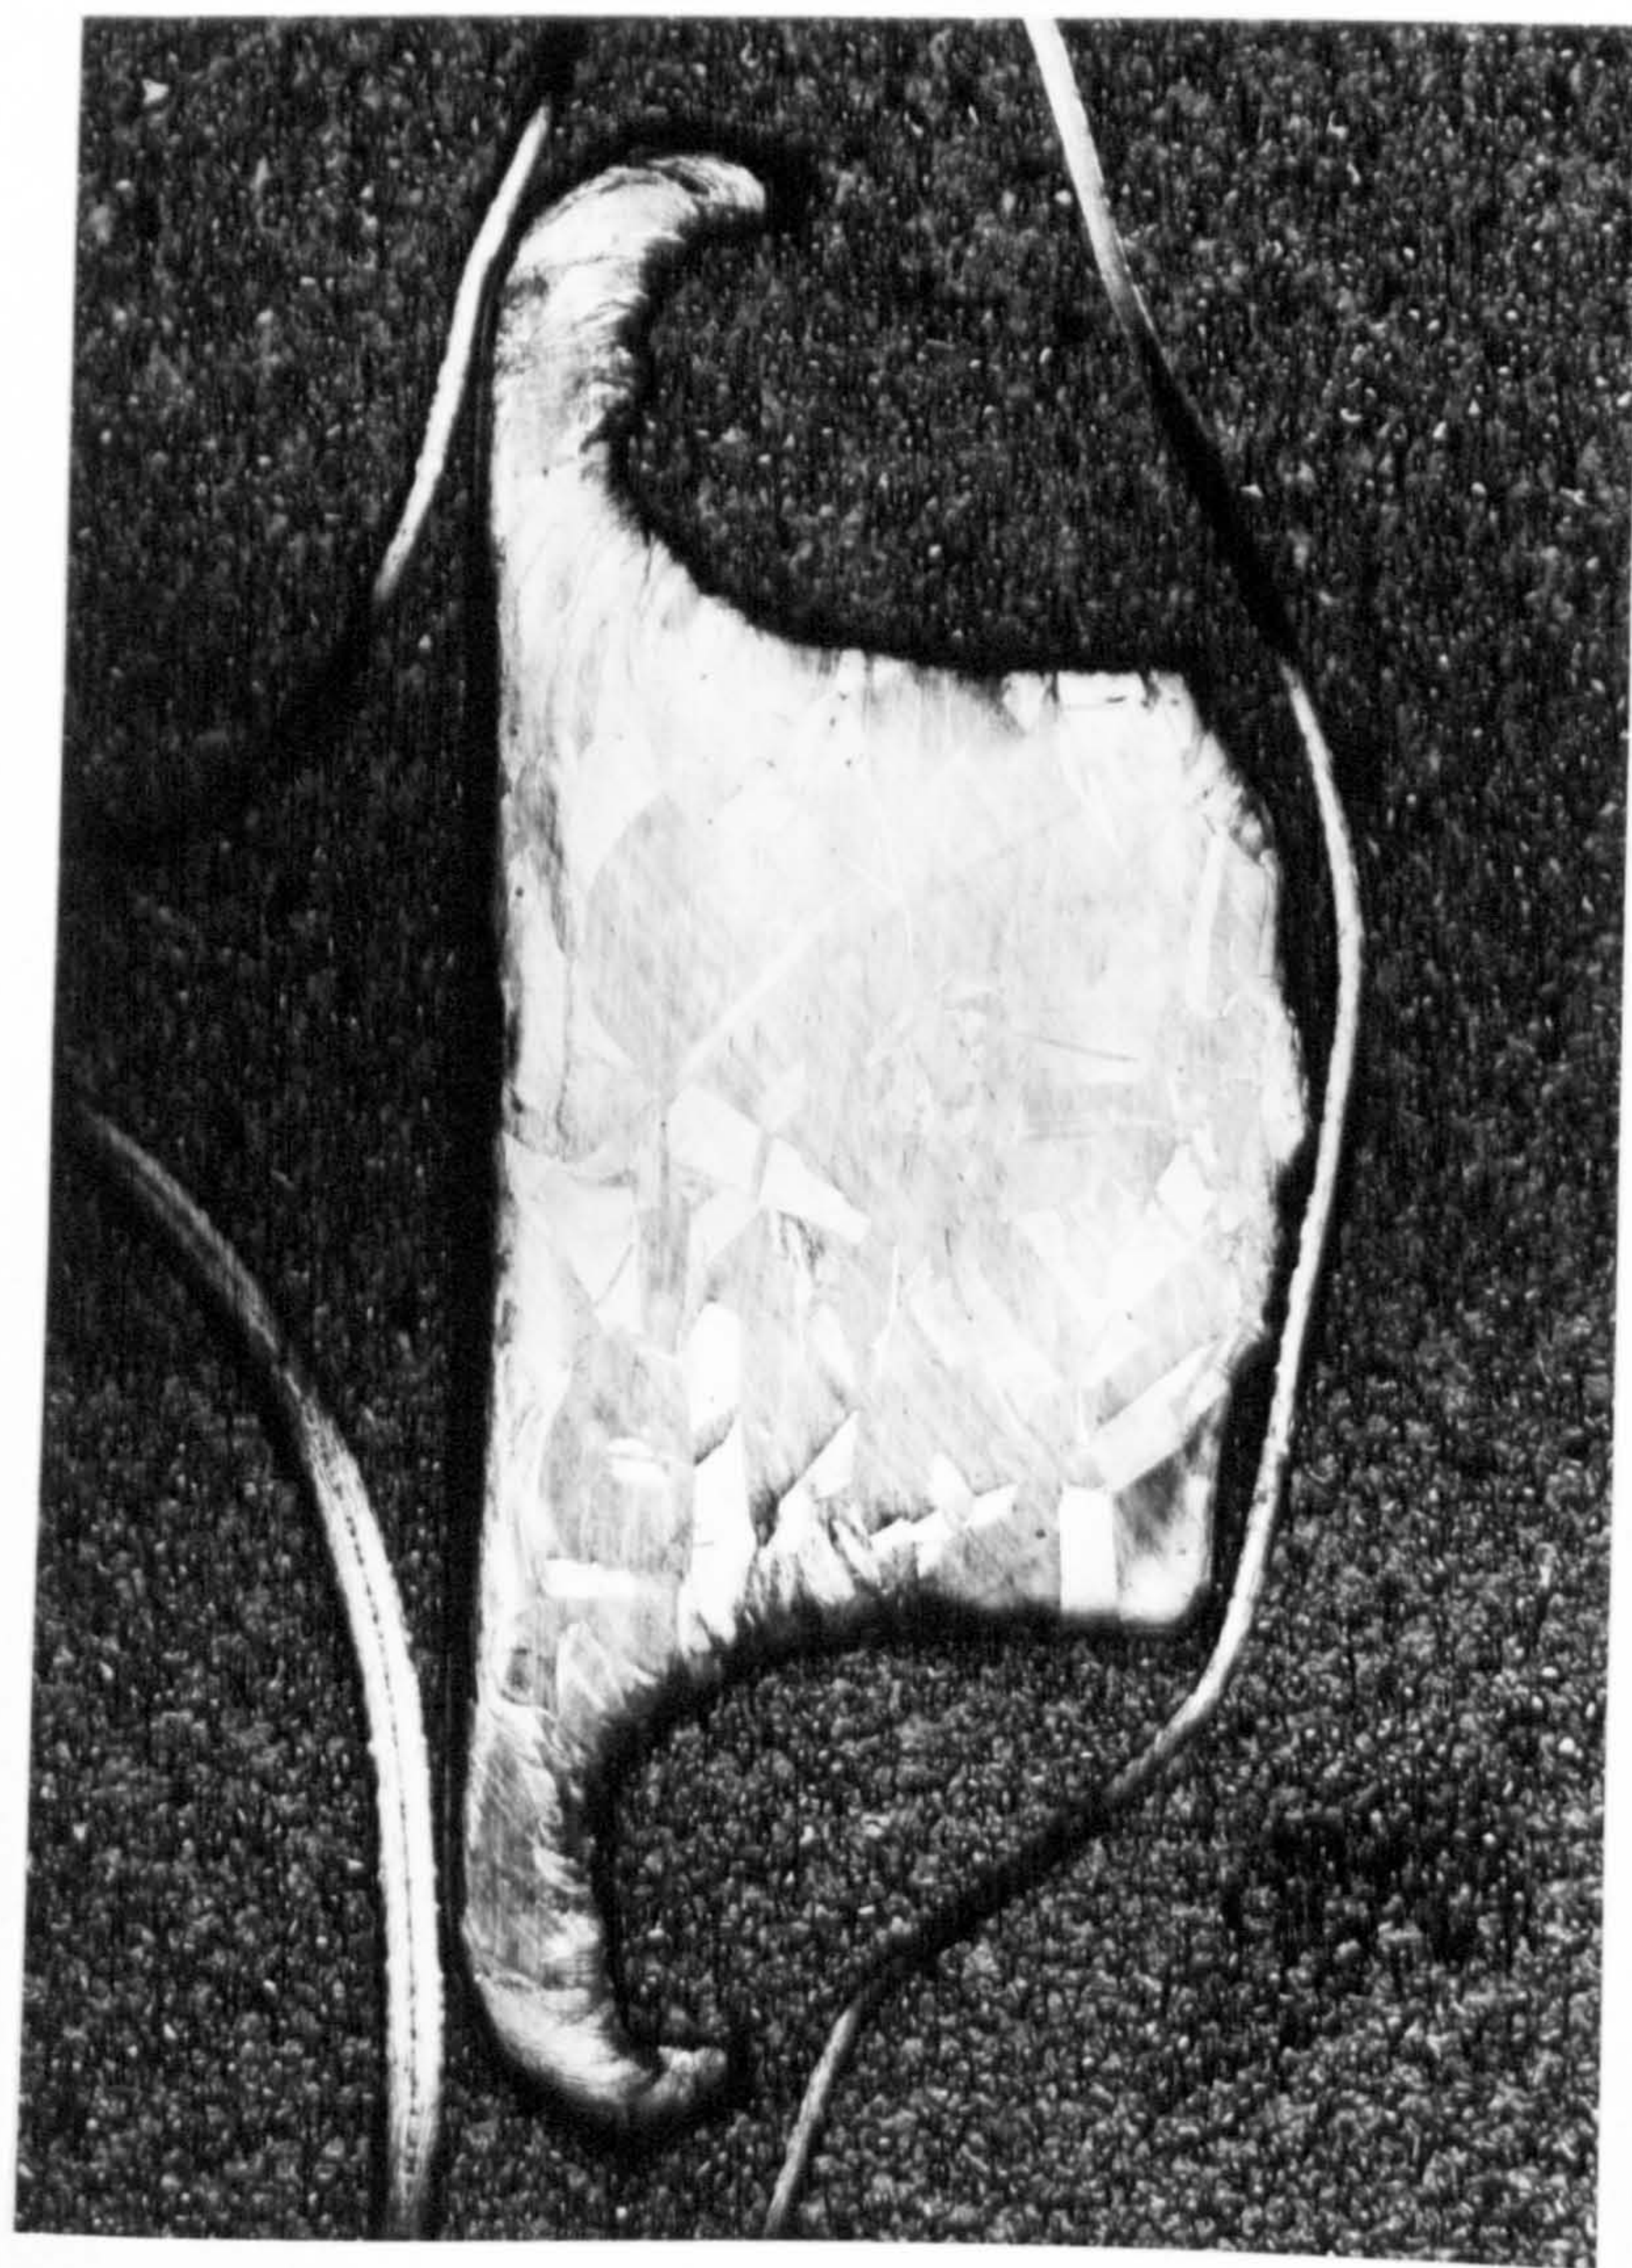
CROSS-SECTION OF AN INITIALLY 3.55 MM WIDE COPPER SPECIMEN AFTER MACHINING, SHOWING
